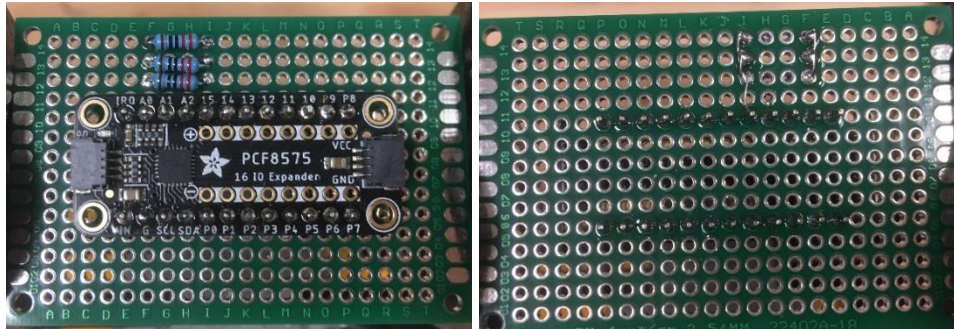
Soldered PCF8575 Prototype Circuit
